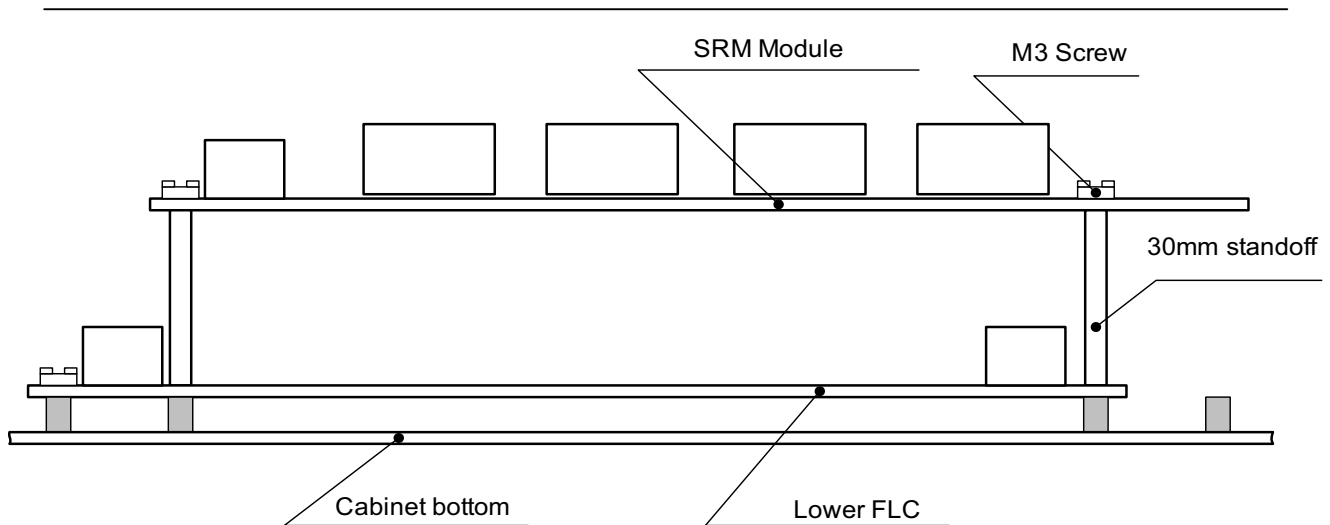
Optional SRM module mounting in the Main Cabinet (side view).
